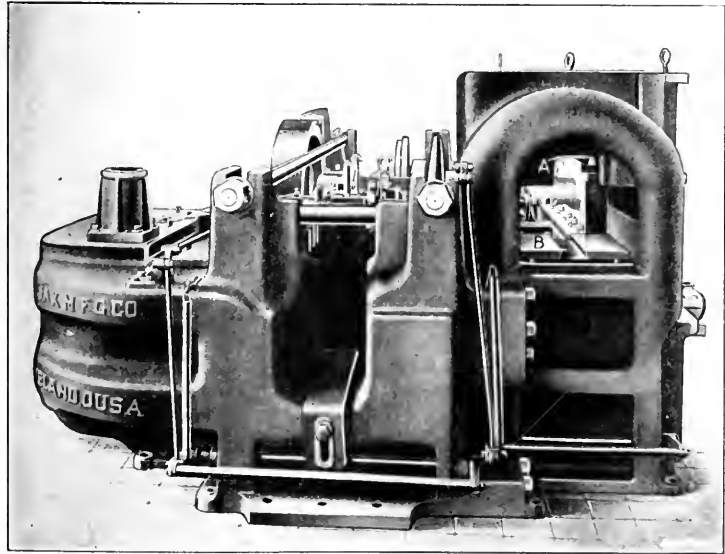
Six-inch Ajax Universal Forging Machine used in the C. & N. W. Railway Shops for making the Forged Parts shown in Fig. 70
